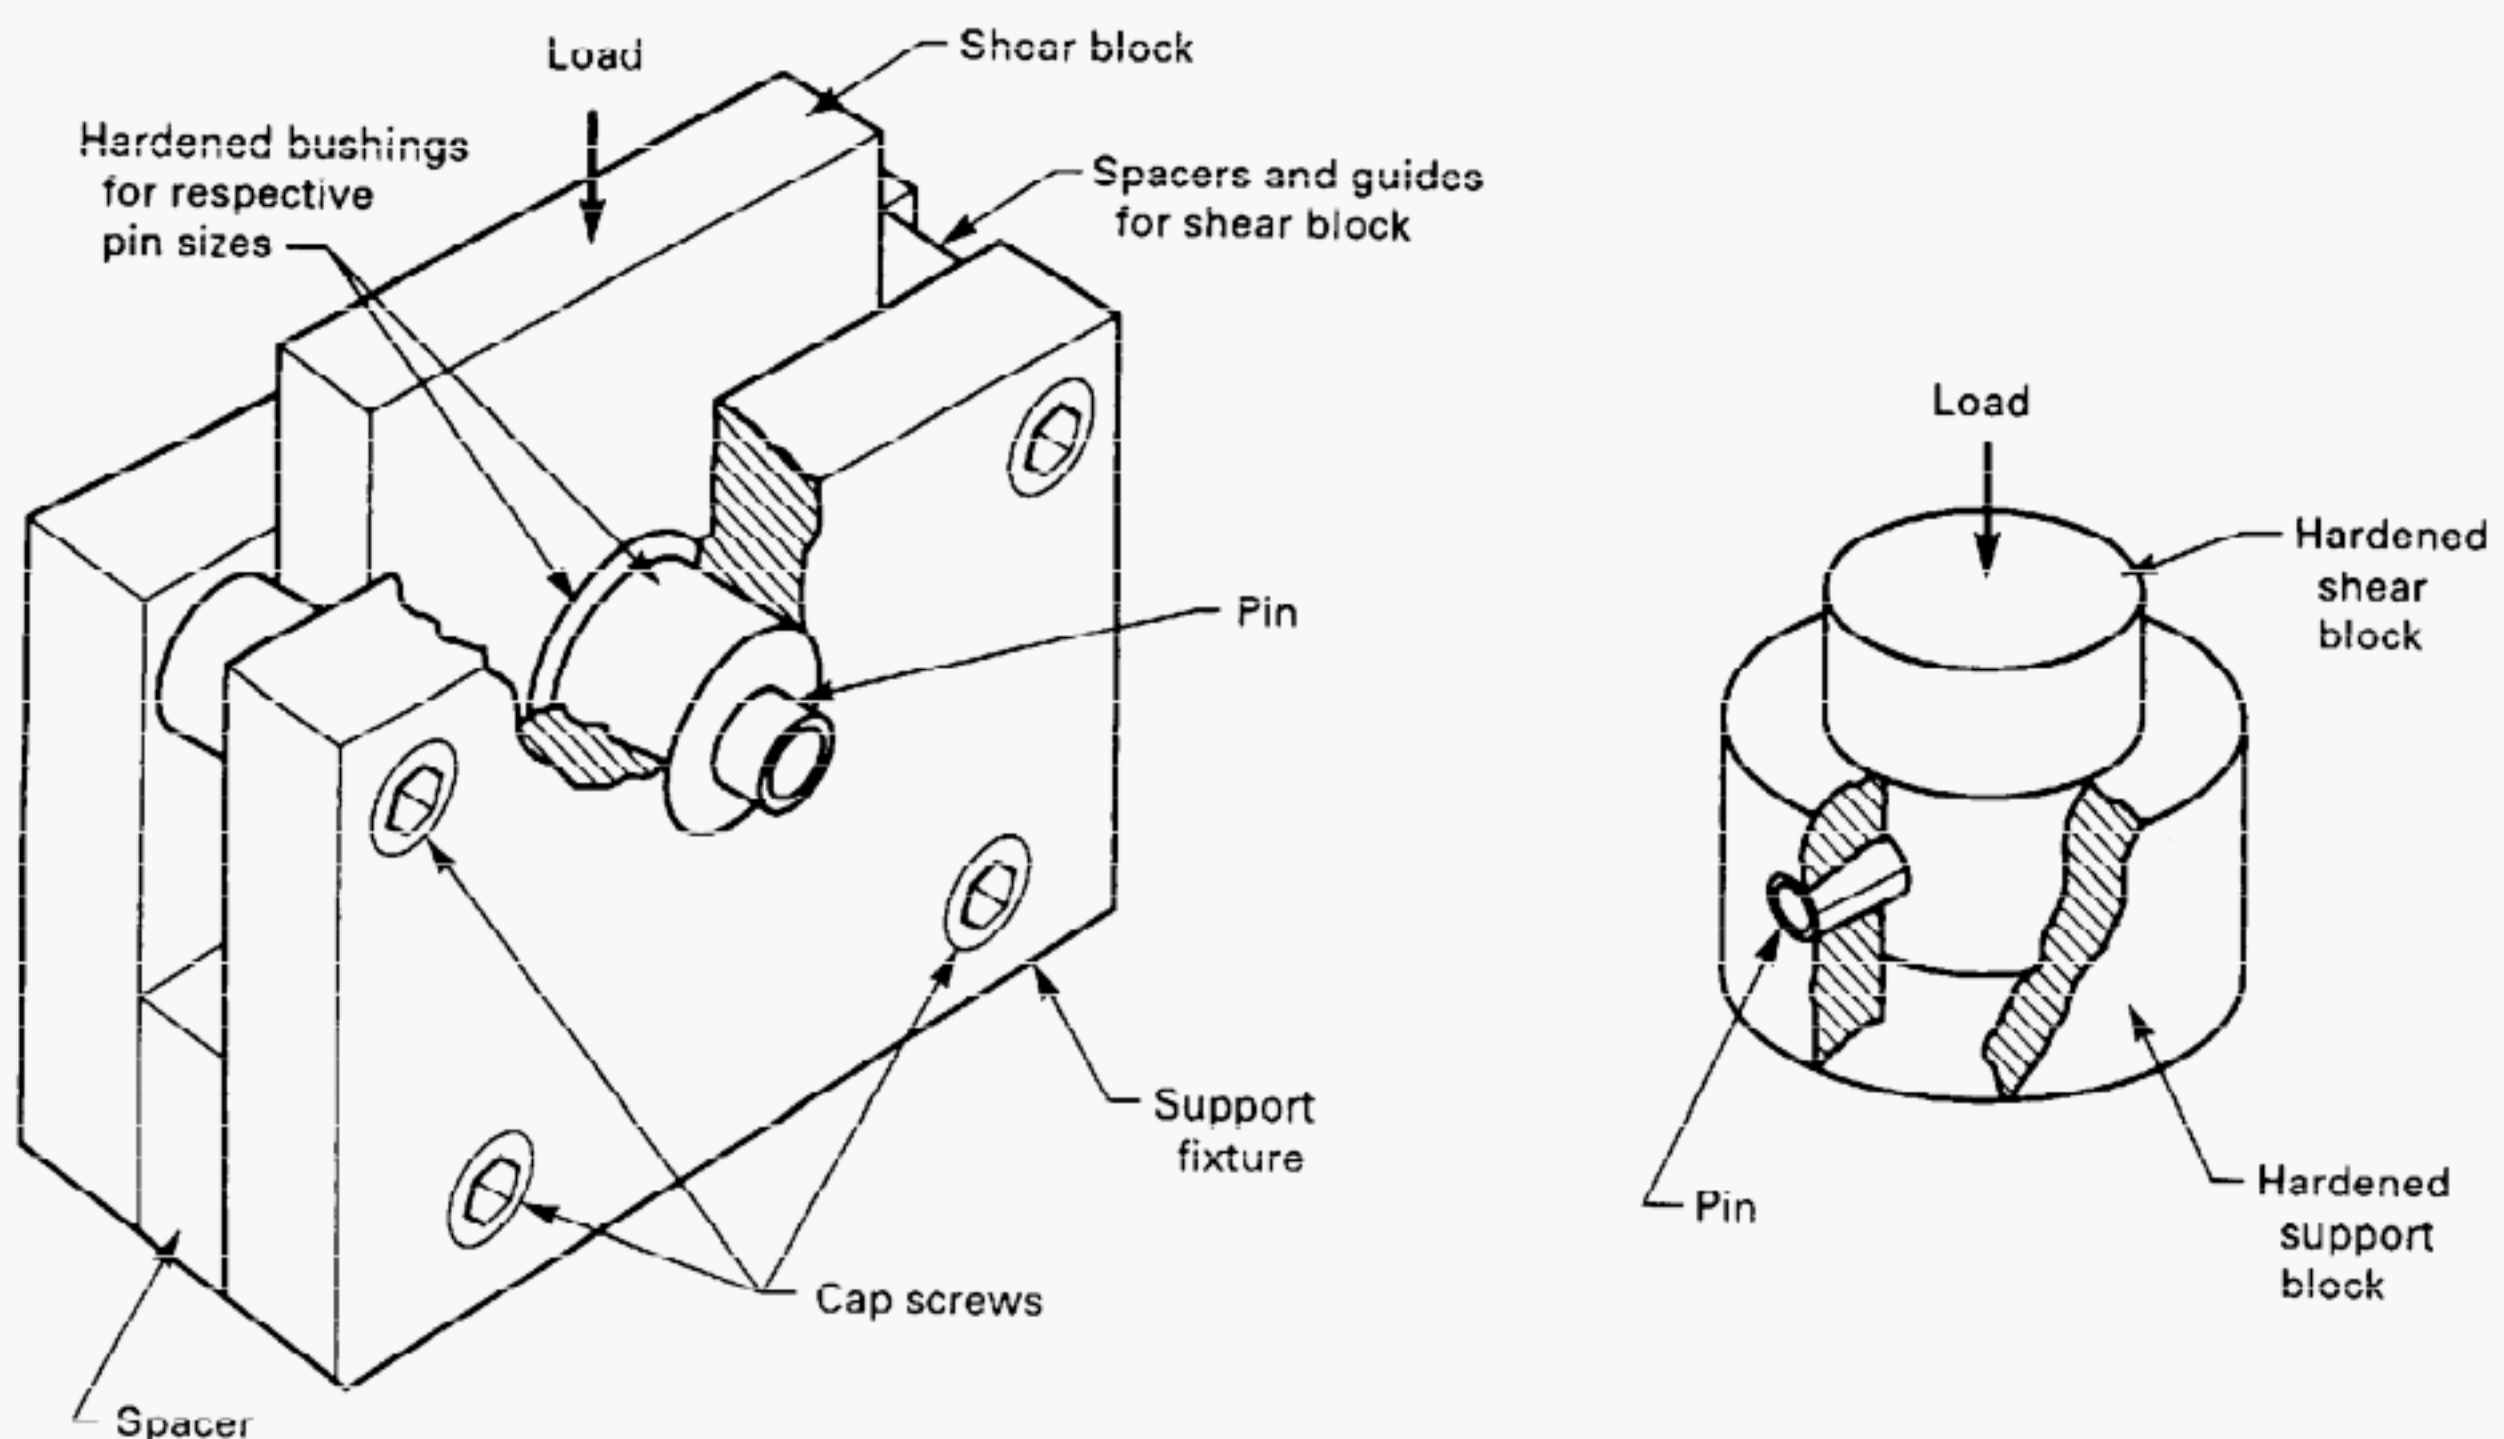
TYPICAL PIN SHEAR TEST FIXTURES
